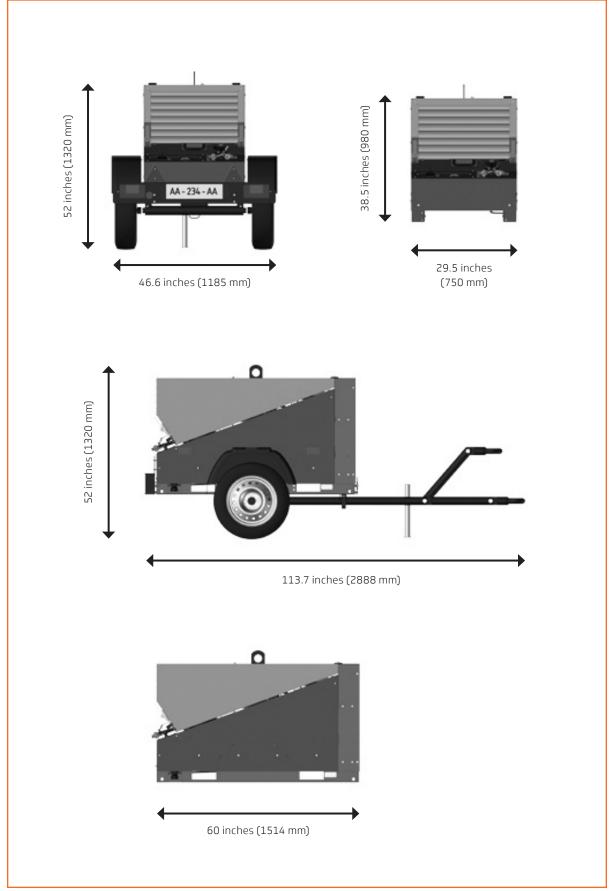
WHEEL-MOUNTED AND SKID-MOUNTED DIMENSIONS
